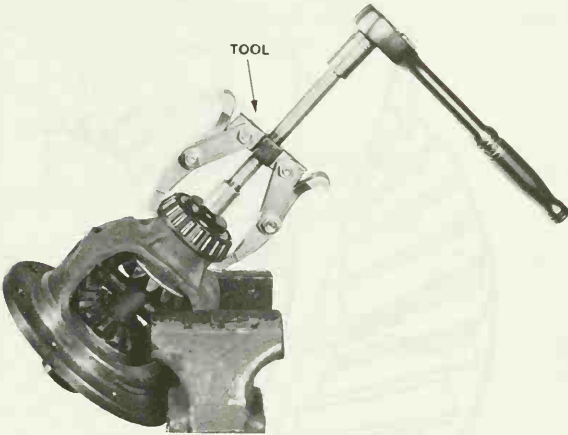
The differential case bearings are removed with a puller. (American Motors Corporation)
